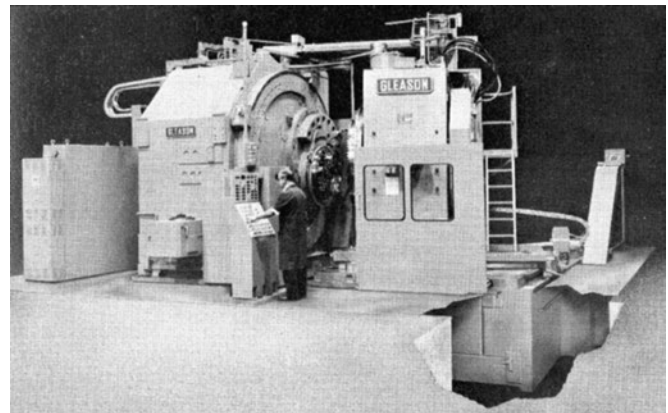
Large, heavy-duty machine for cutting spiral bevel and hypoid gears. (Courtesy of Gleason Works, Rochester, New York.)
